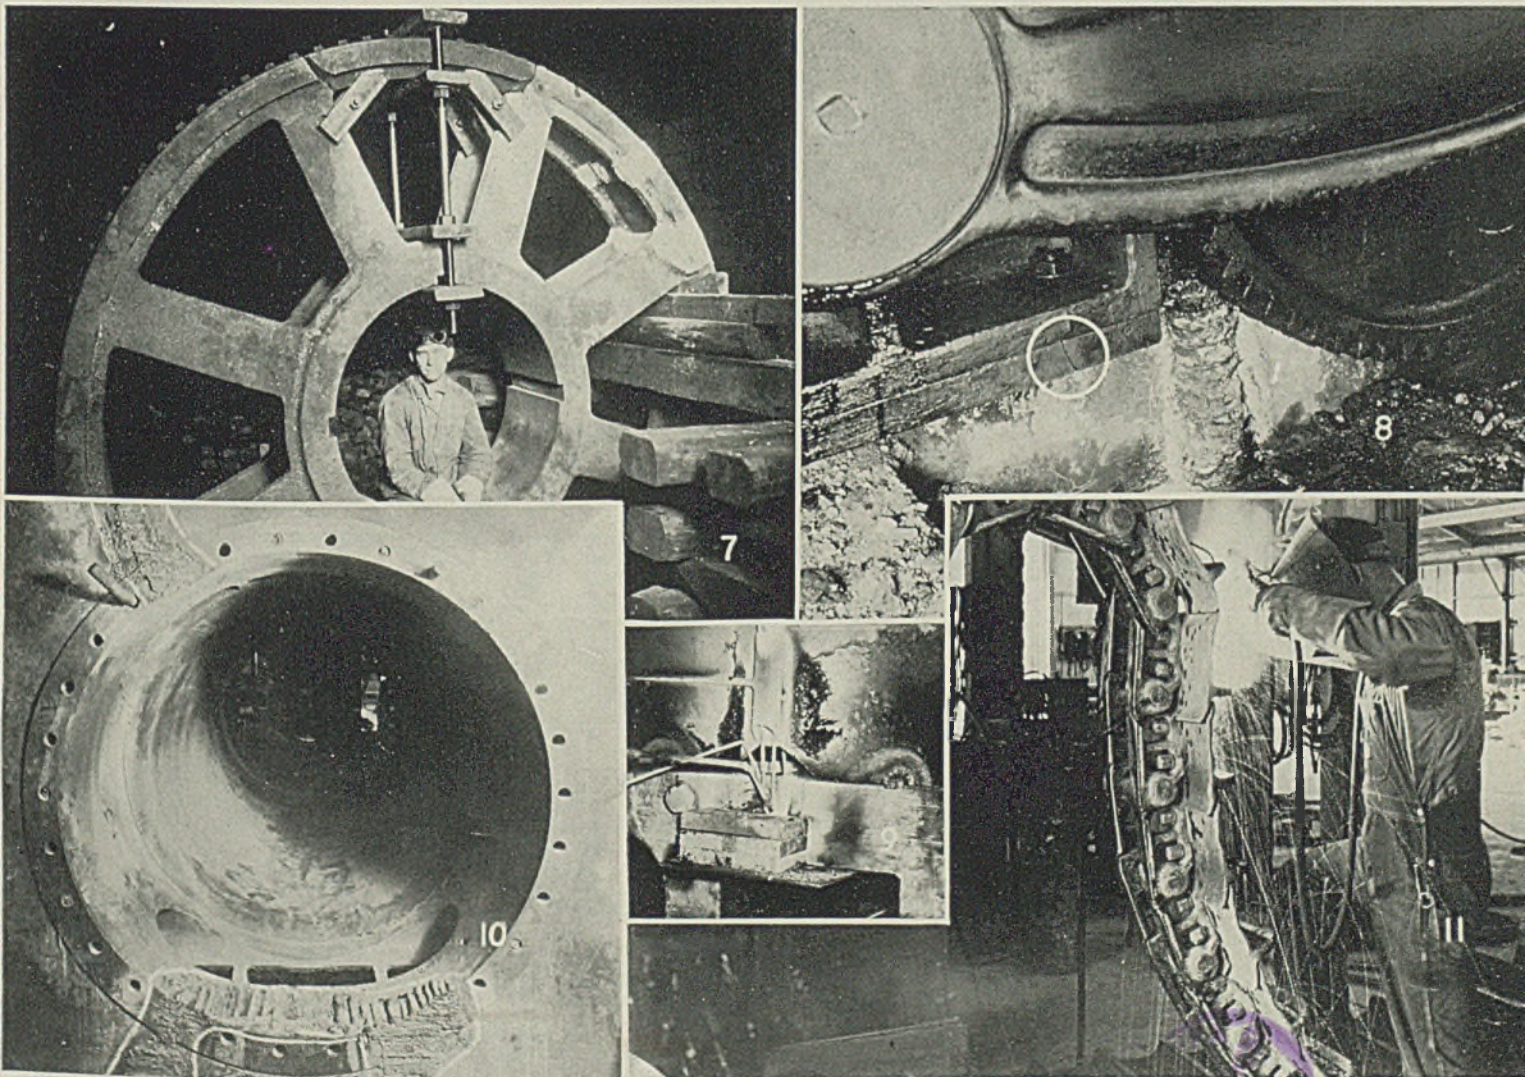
A break in the base frame of this bulldozer was veed out and welded. Steel mill welding crews must be prepared to make such emergency repairs promptly, to minimize interruption of production operations as old machines are overworked on war production
